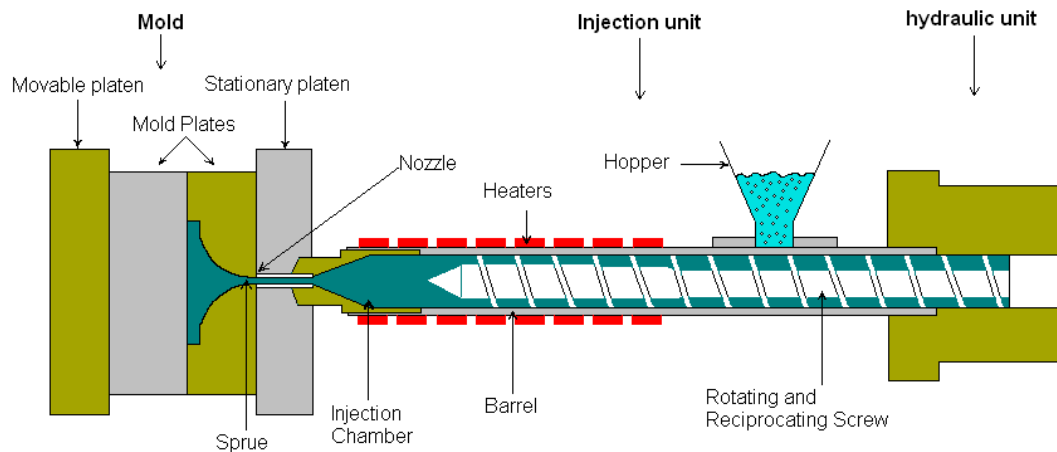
A single screw injection molding machine (The Santa Clara University Design Center 1998).
